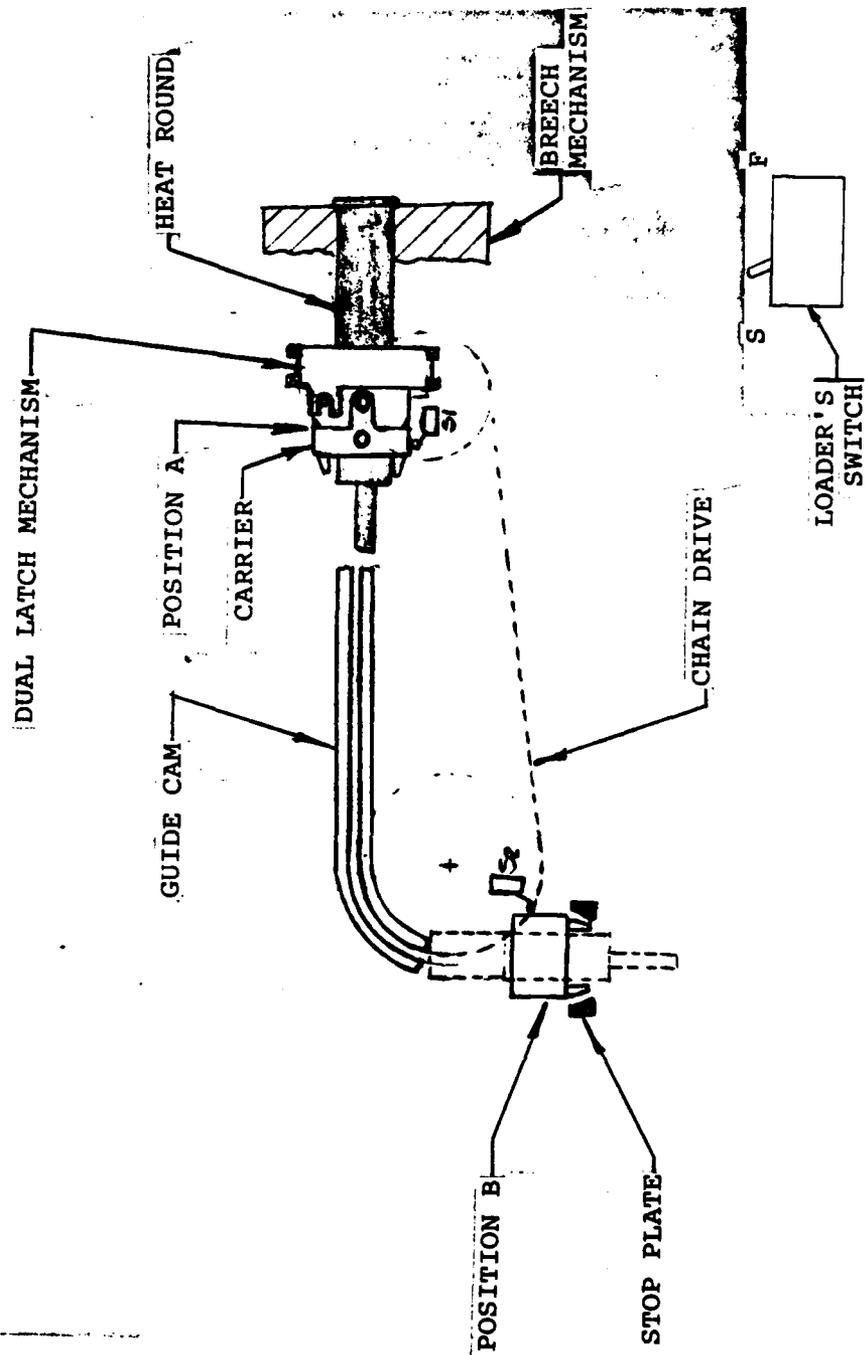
Projectile Transport Mechanisms - Cam - Guided Chain Drive
